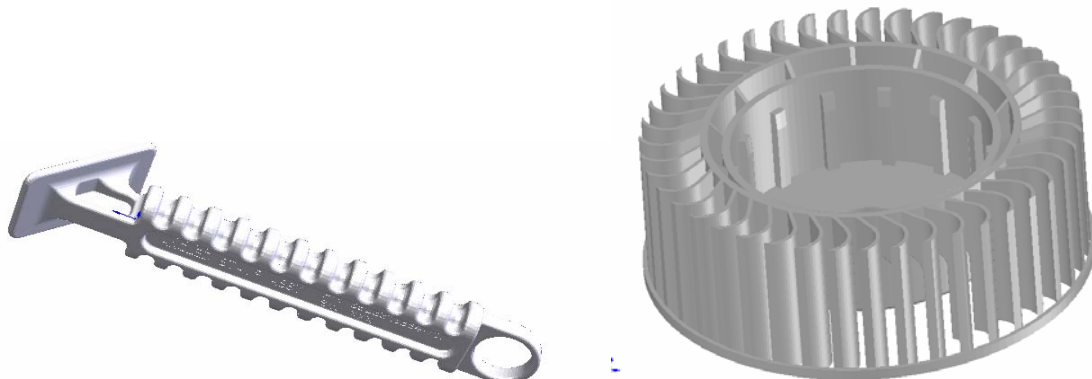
4" Angled Stamp (L) and 3"OD Blower Impeller (R)
